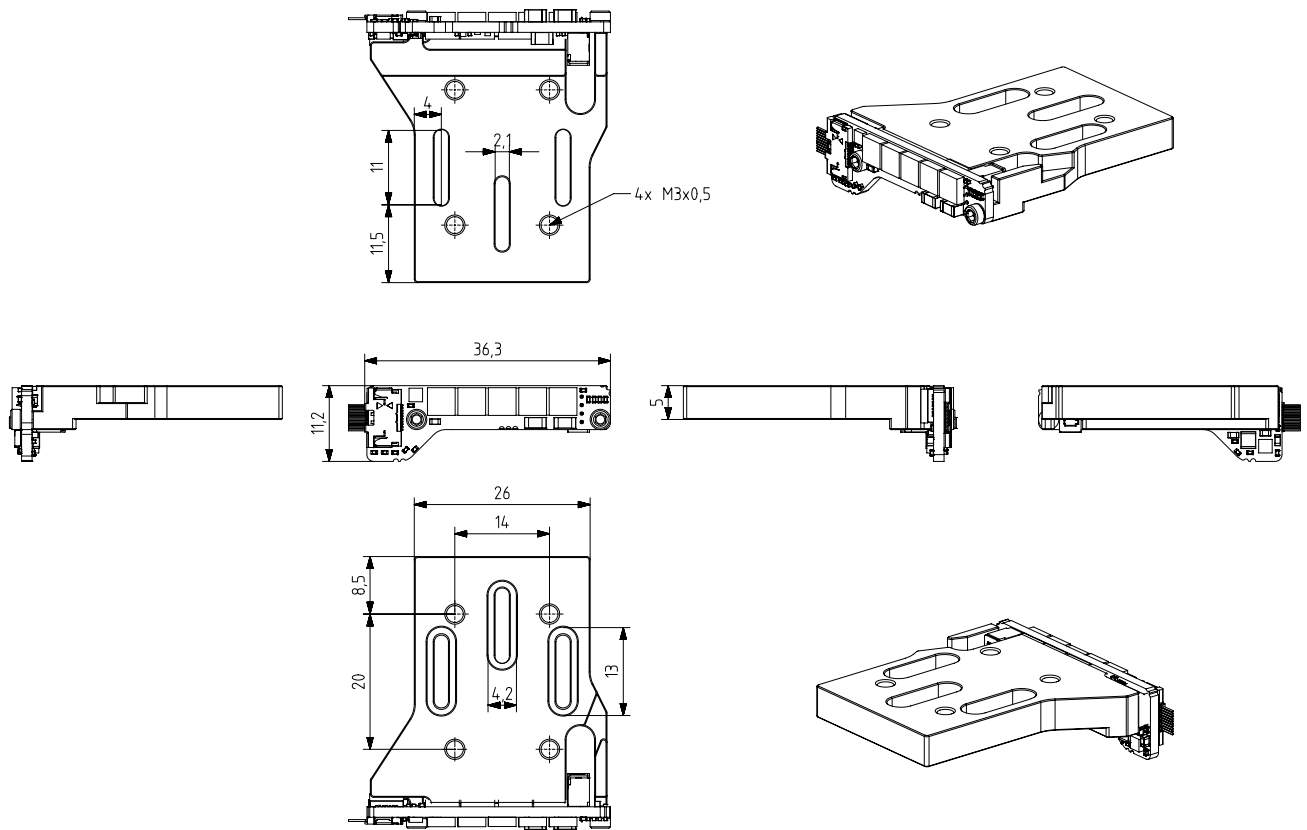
Dimensional drawing of VCSEL-SLIM-W
